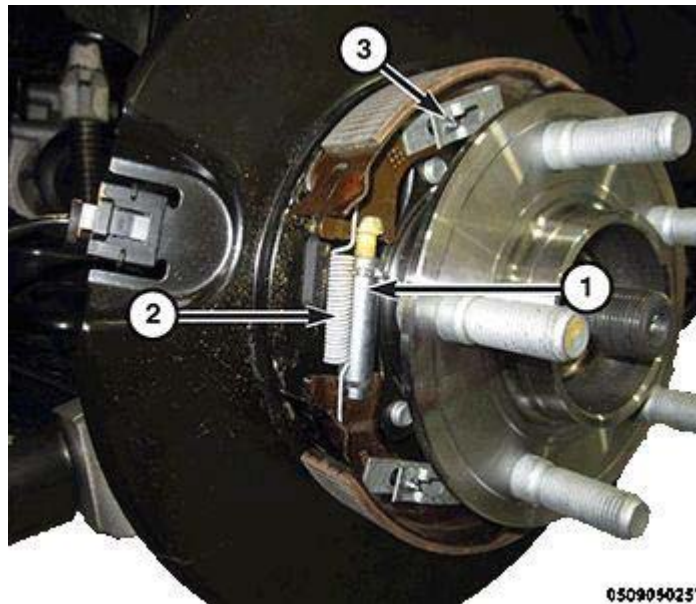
Parking Brake Shoe Adjustment, Adjuster Spring & Adjuster
